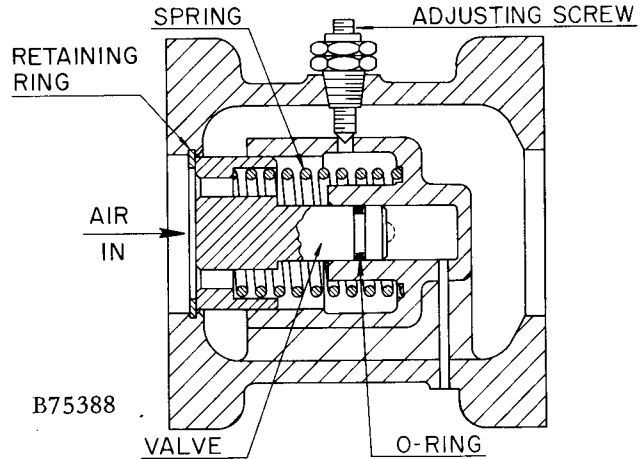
MINIMUM DISCHARGE PRESSURE VALVE
